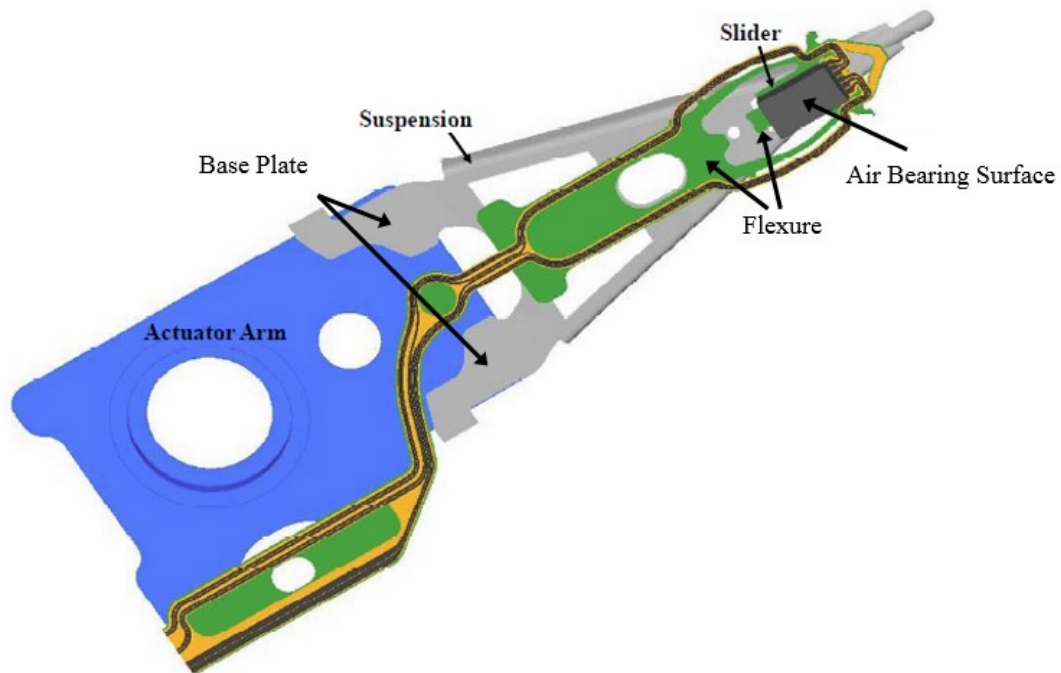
Schematic of head gimbal assembly (HGA) in hard disk drives (courtesy of [6])
